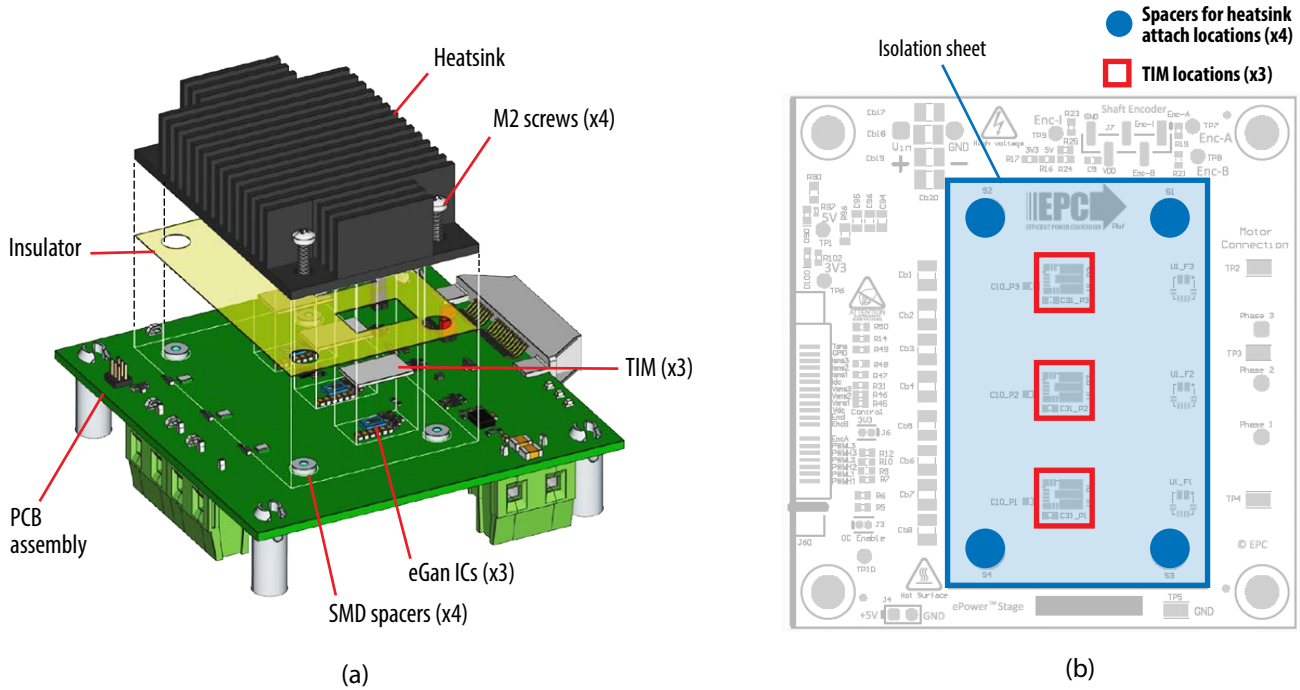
Details for attaching a heatsink to the board. (a) exploded 3D perspective, (b) top view showing the insulator sheet details with opening for the TIM with location of the eGaN ICs
